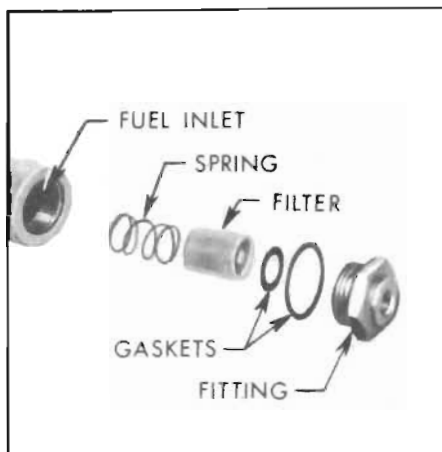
V-6 Engine Carburetor Fuel Filter
